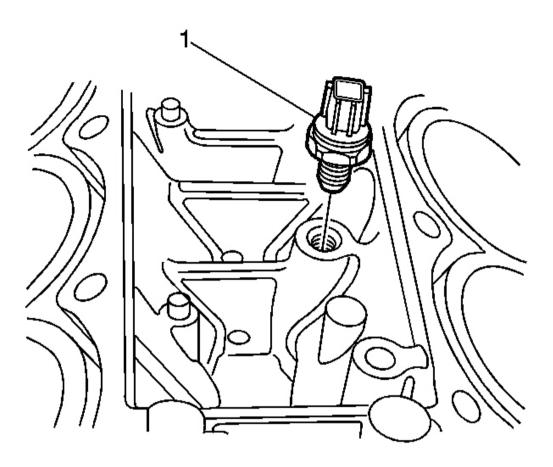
View Of Knock Sensor (KS) System Courtesy of GENERAL MOTORS CORP.
